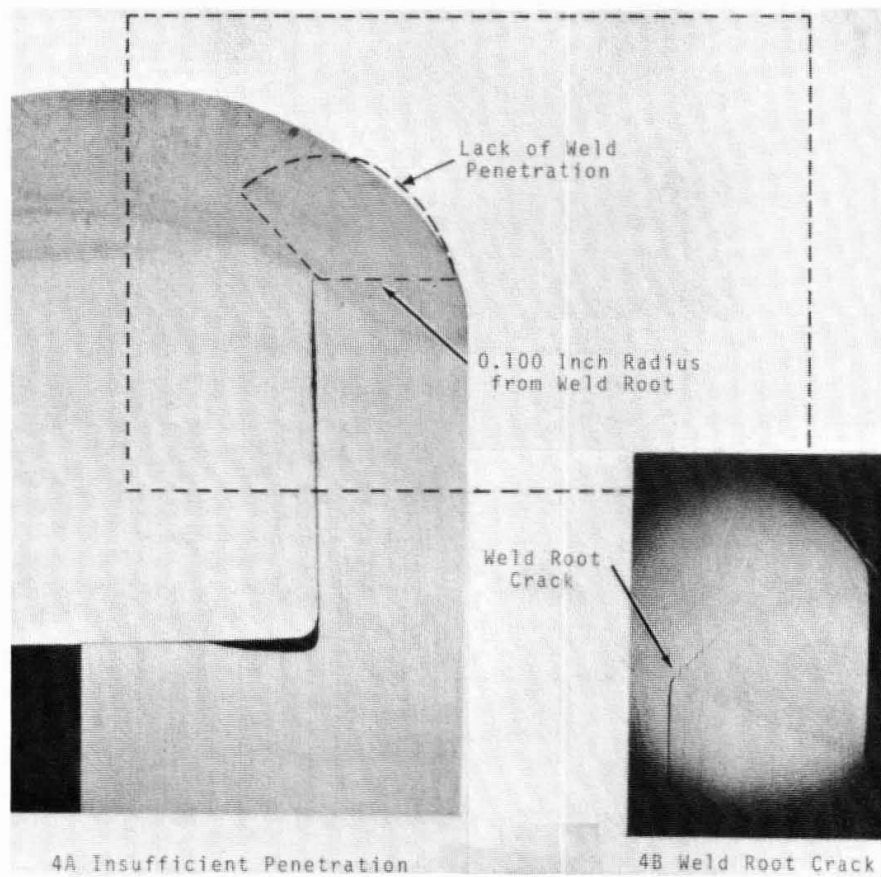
Undesirable parameters in Phase I SNAP-21 welds
